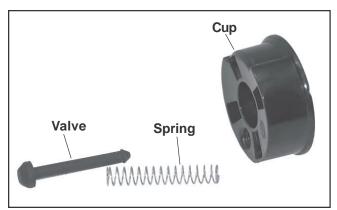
Rubber Valve and Spring Removed from Cup.
